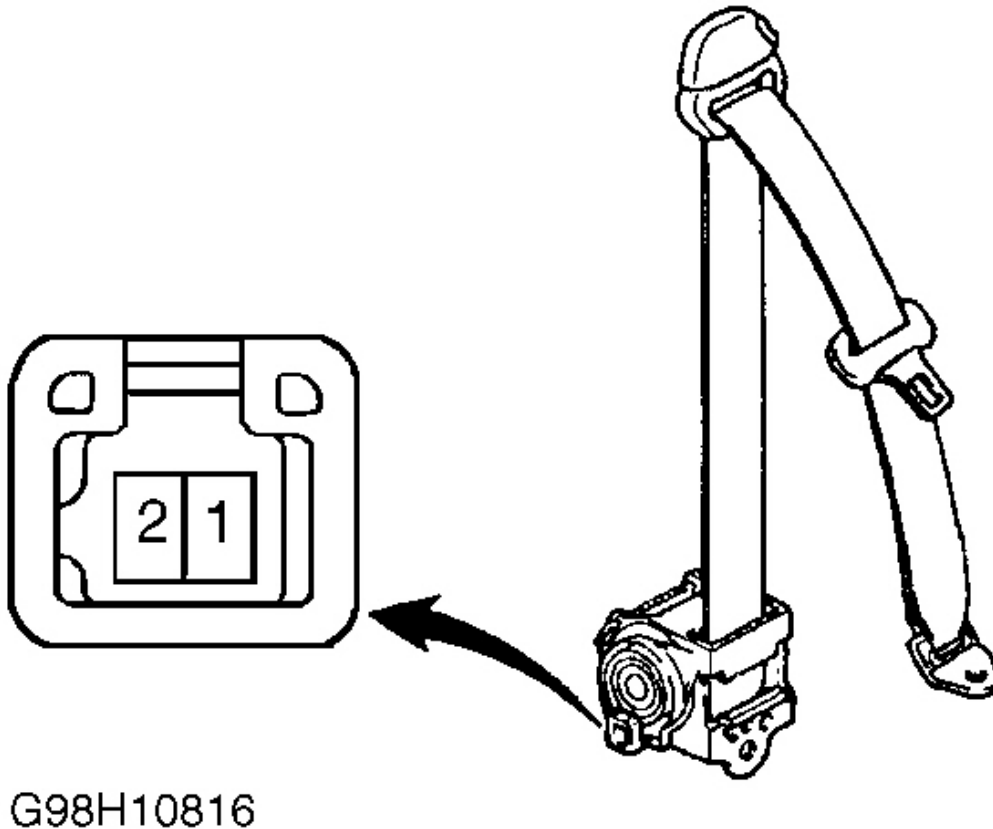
Testing Seat Belt Retractor Switch (RAV4 & Sienna)
